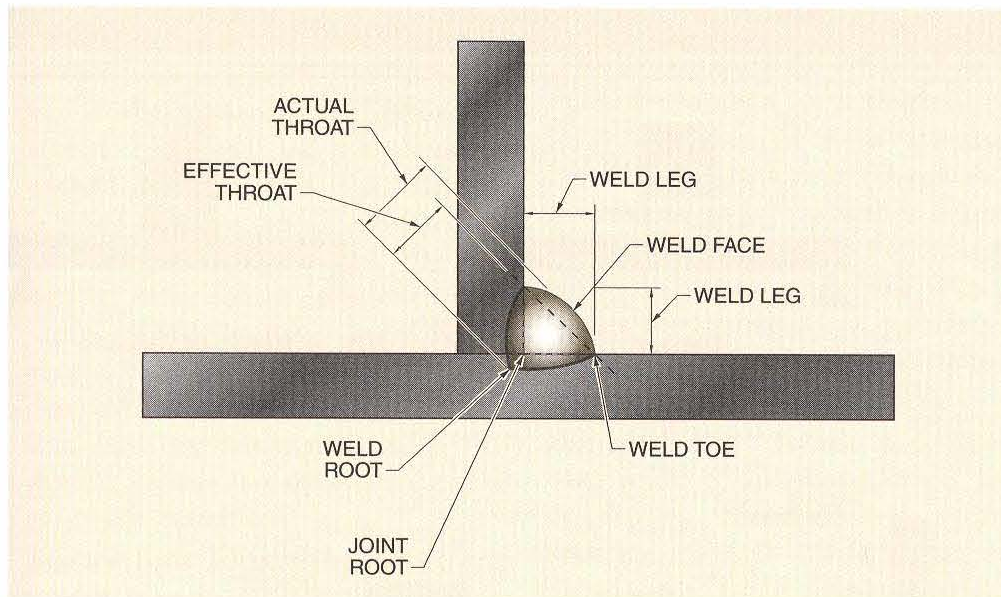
A fillet weld can be cross-sectioned to identify its various parts.
